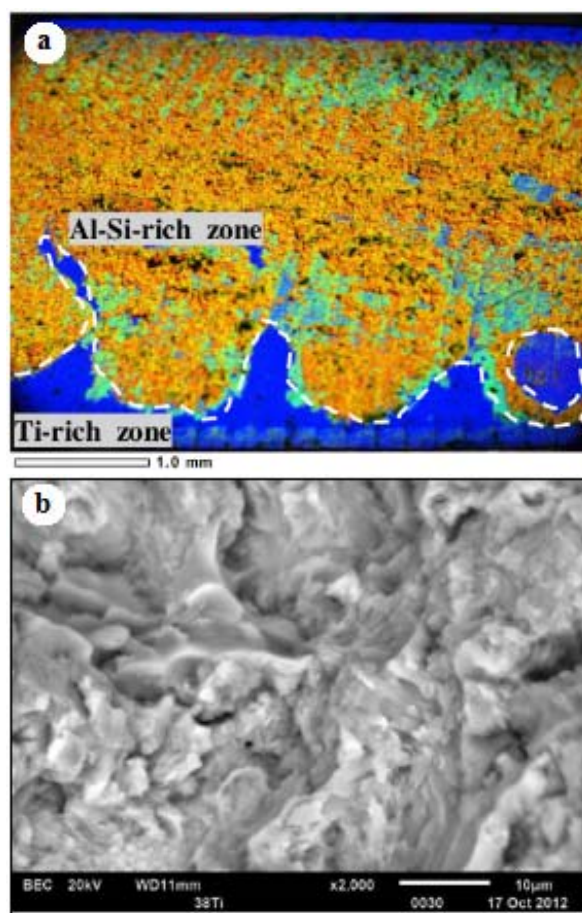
Fracture surface (a) X-map of global view and (b) Zoom on fracture surface in Al-Si rich zone
